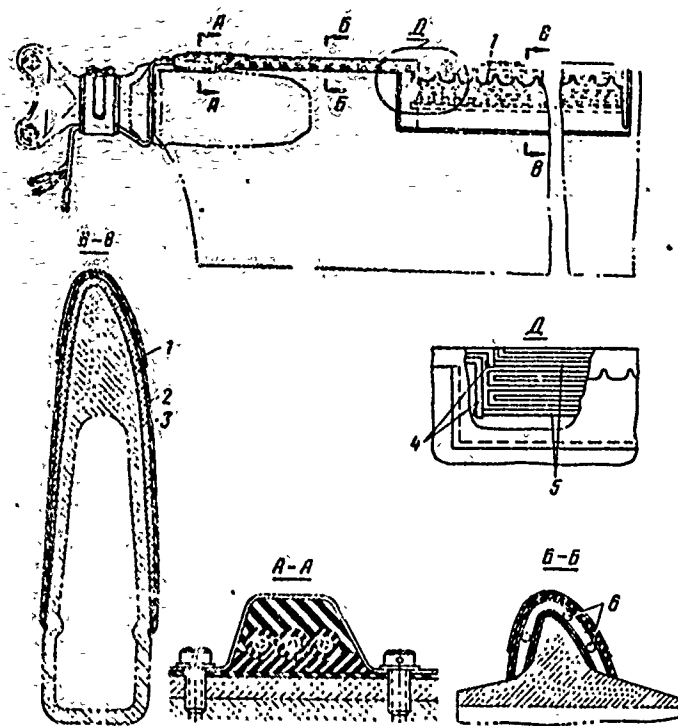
Anti-Icing Installation of a Tail Rotor Blade:
